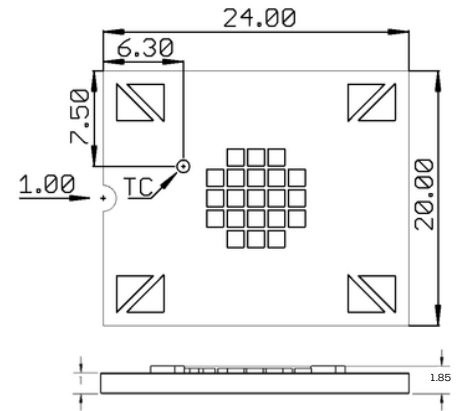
L511A-RGBxxxY Mechanical Drawing
